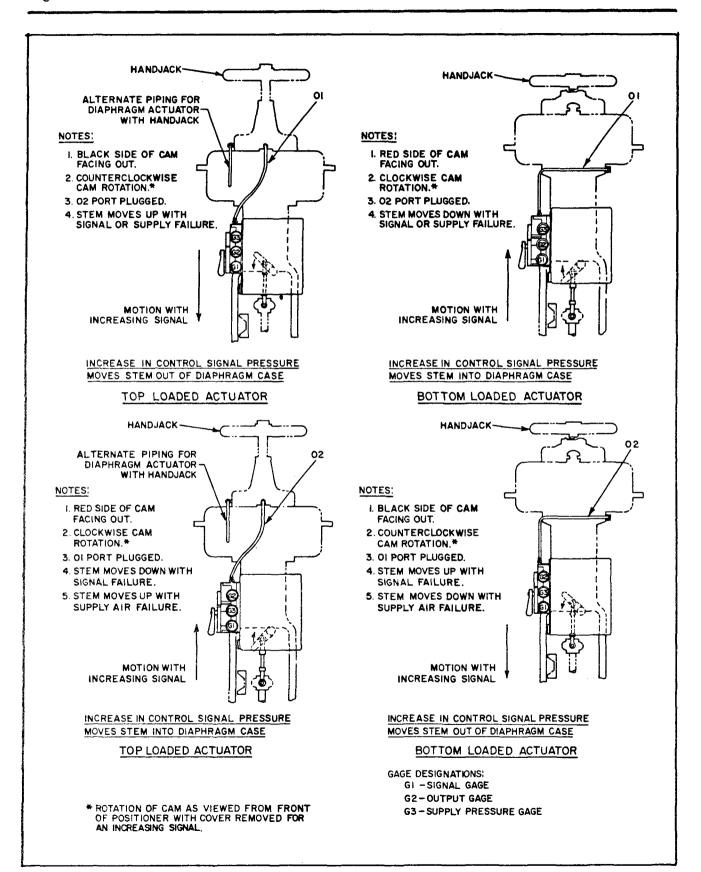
Typical Positioner Installation Mounted on Single-Acting Diaphragm Actuator 1.2.23-471 3
